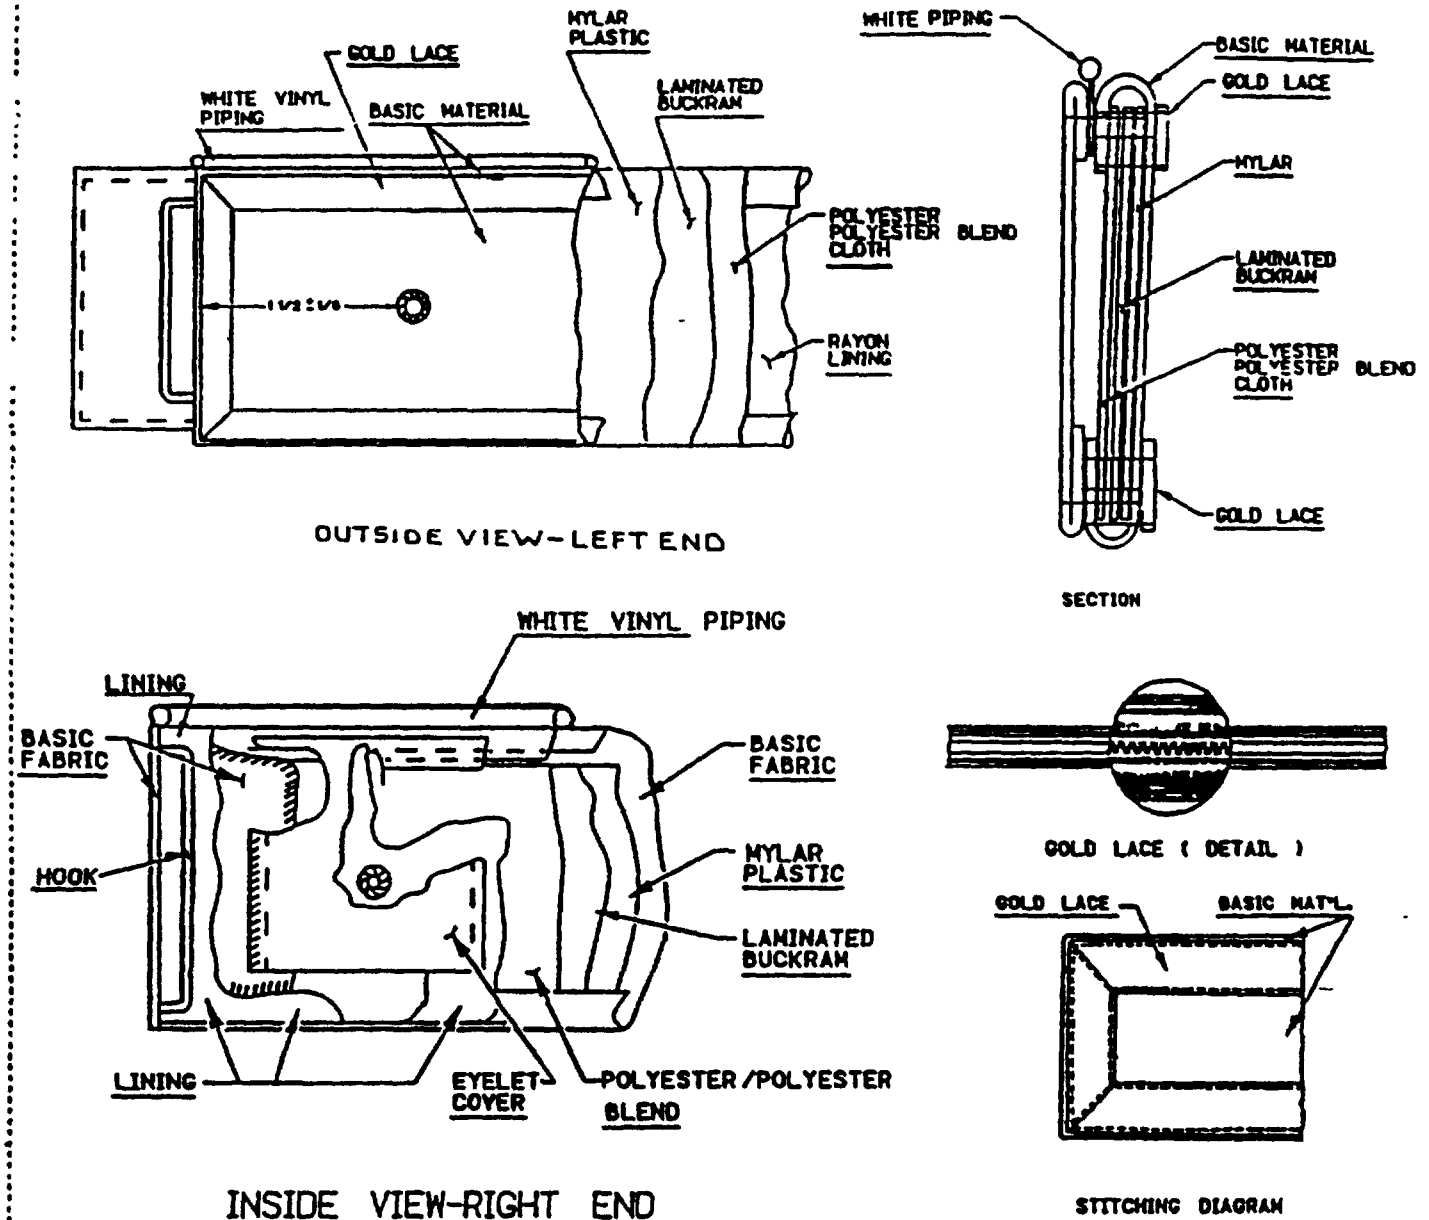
COAT, MAN'S: SCARLET, DRUM AND BUGLE CORPS: DRUM MAJOR
